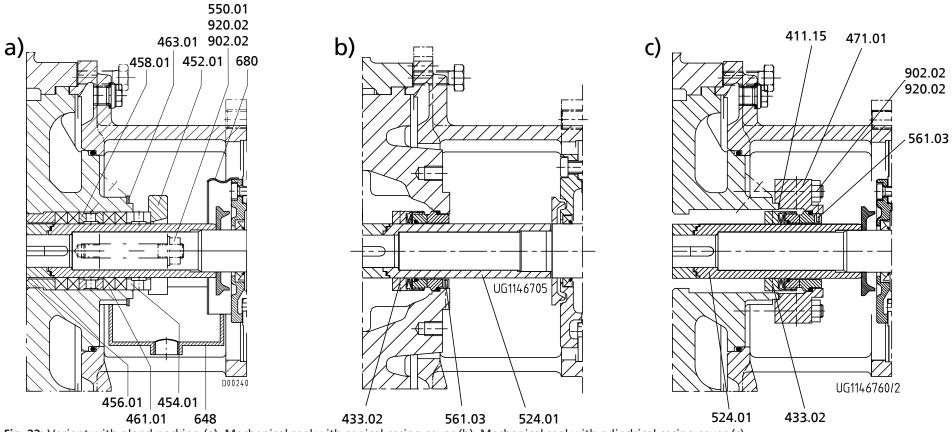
Variant with gland packing (a), Mechanical seal with conical casing cover (b), Mechanical seal with cylindrical casing cover (c)
